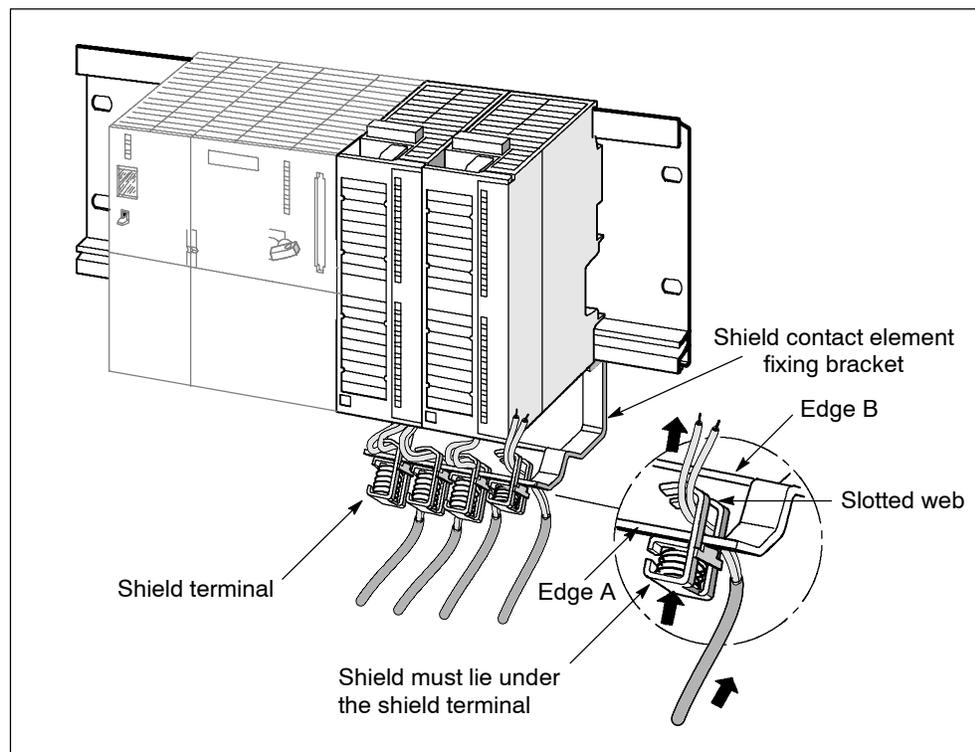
Attaching Shielded Cables to Shield Contact Element
